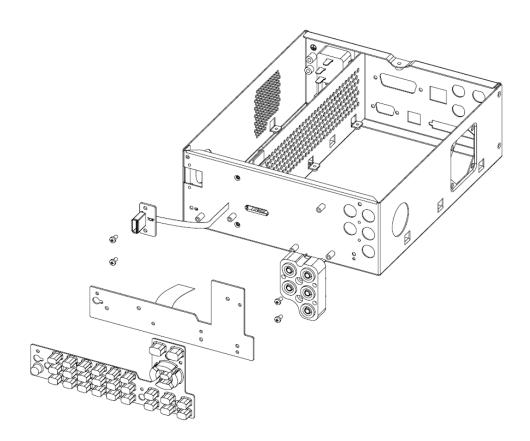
The Schematic of Disassembling and Assembling Key Board PCB
